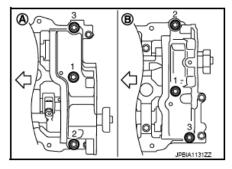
Actuator Bracket Mounting Bolts Tightening Sequence Courtesy of NISSAN MOTOR CO., U.S.A.
